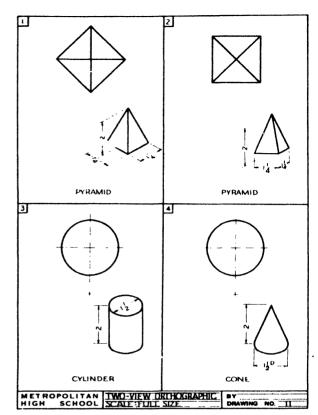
TWO-VIEW ORTHOGRAPHIC DRAWING (PROBLEMS 1, 2, 3, AND 4)
